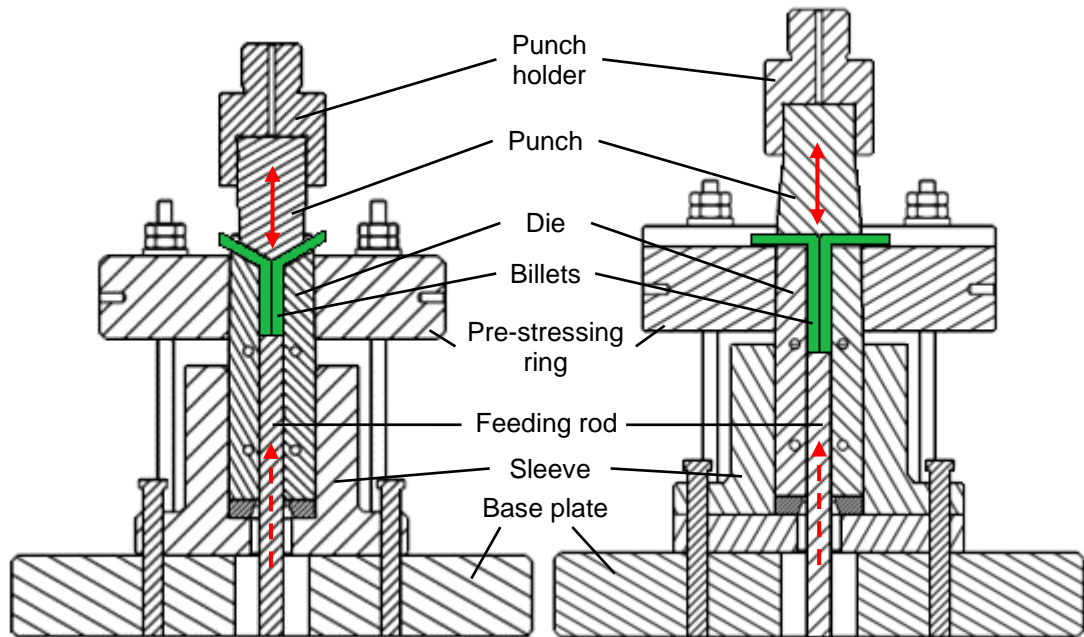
CAD drawing of the I-ECAP tool assembly for (a) $\Phi = 120^\circ$ and (b) $\Phi = 90^\circ$.
